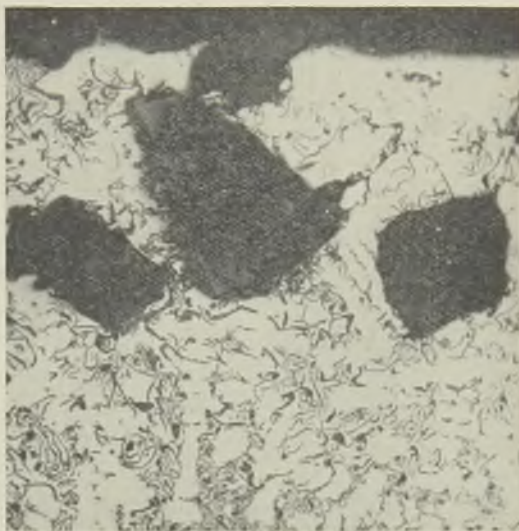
CROSS-SECTION OF EDGE OF CASTING SHOWING ENTRAPPED SAND GRAINS. $\times 100$.
